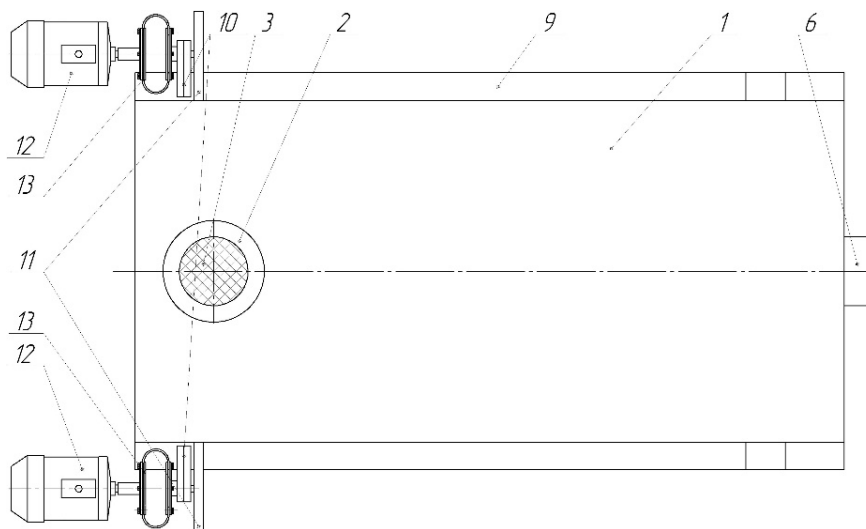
Scheme of a vibrating machine for dry cleaning of root vegetables, top view
